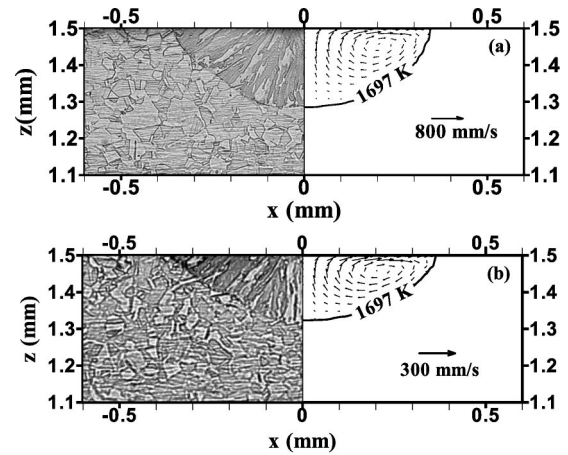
Experimental and calculated weld pool cross sections. Laser power: 1067 W and pulse duration: 3 ms; (a) beam radius: 0.325 mm and (b) beam radius: 0.466 mm.
